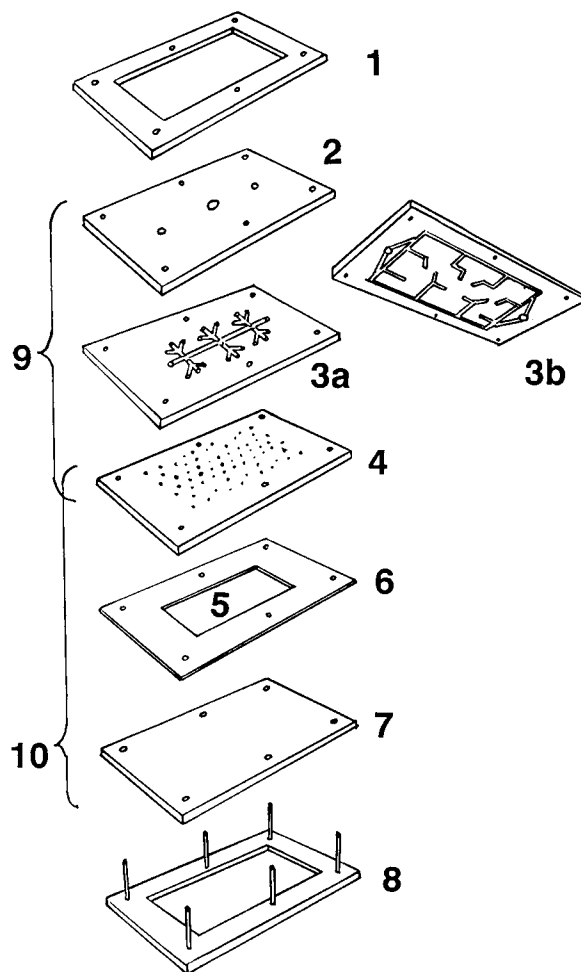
Exploded view of mold: (1) top support; (2) top plate; (3a) channel plate seen from polymer channel side; (3b) channel plate seen from vacuum channel side; (4) stabilization plate; (5) cavity; (6) frame plate; (7) bottom plate; (8) bottom support; (9) channel unit; (10) cavity unit.
